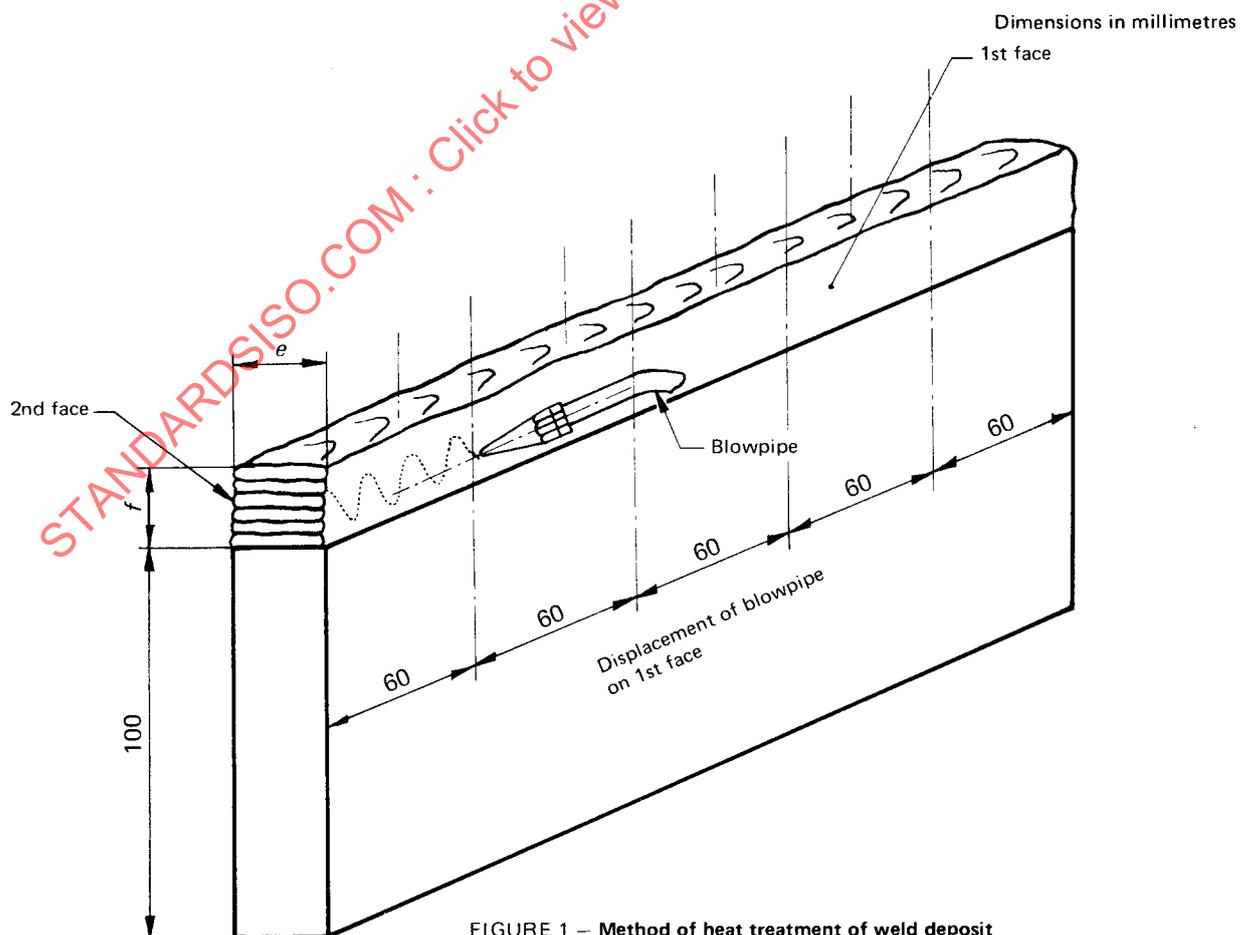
Method of heat treatment of weld deposit
